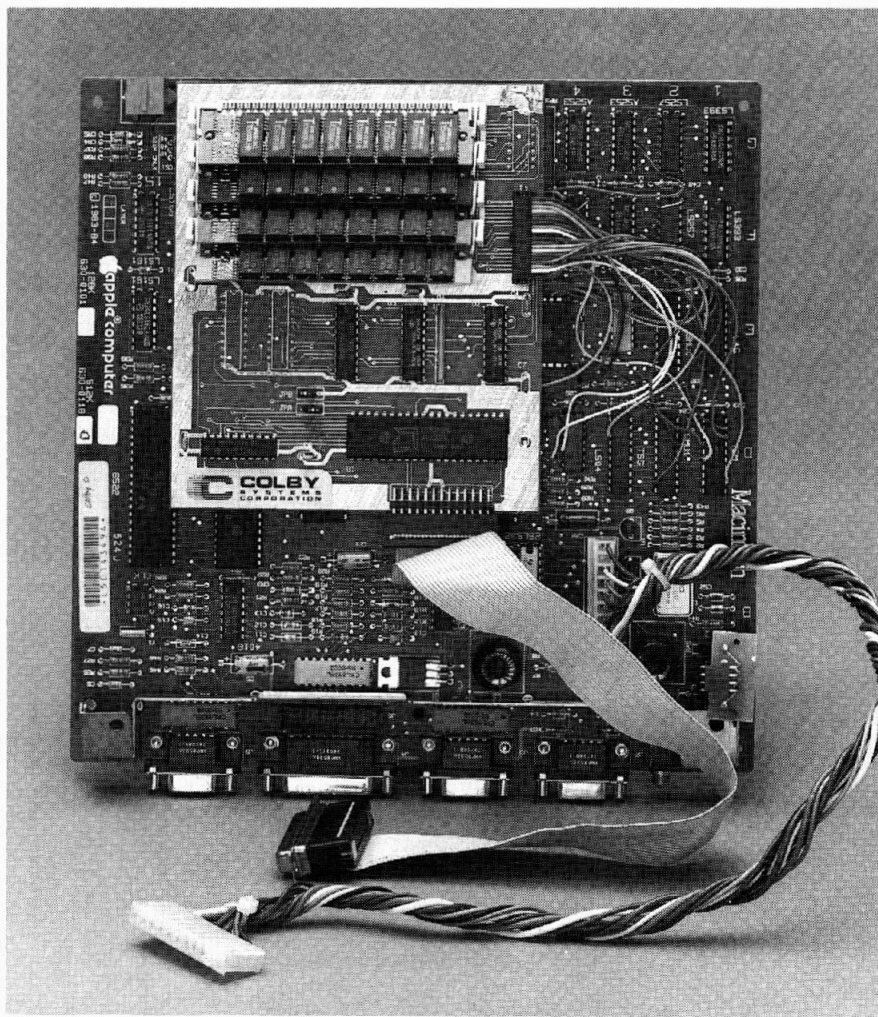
THE COLBY SIMM ADAPTER BOARD requires that 2 DIP's be removed and about 22 wires and a daughter board to be soldered onto the motherboard. It allows you to use standard 256K or 1-MB SIMM's.
